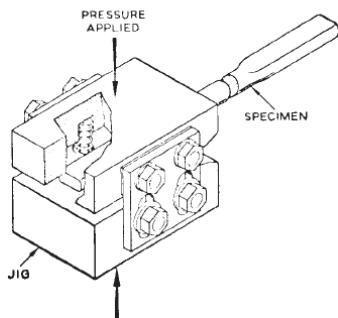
Squeezing Jig for Flattening Ends of Full-Size Tension Test Specimens
